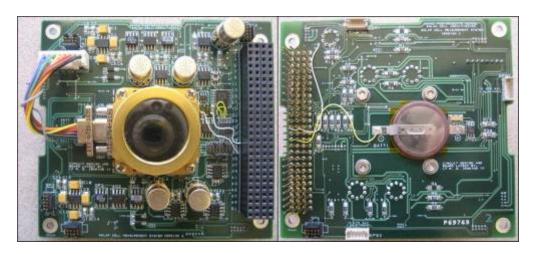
Completed SMS V2 PCB with Sun Sensor (front and back)
